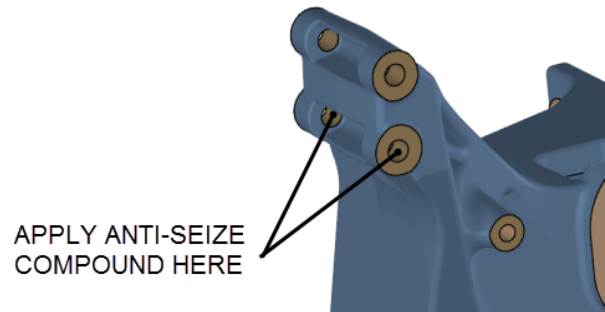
TENSIONER MOUNTING SCREW TORQUE : 48 lb-ft
